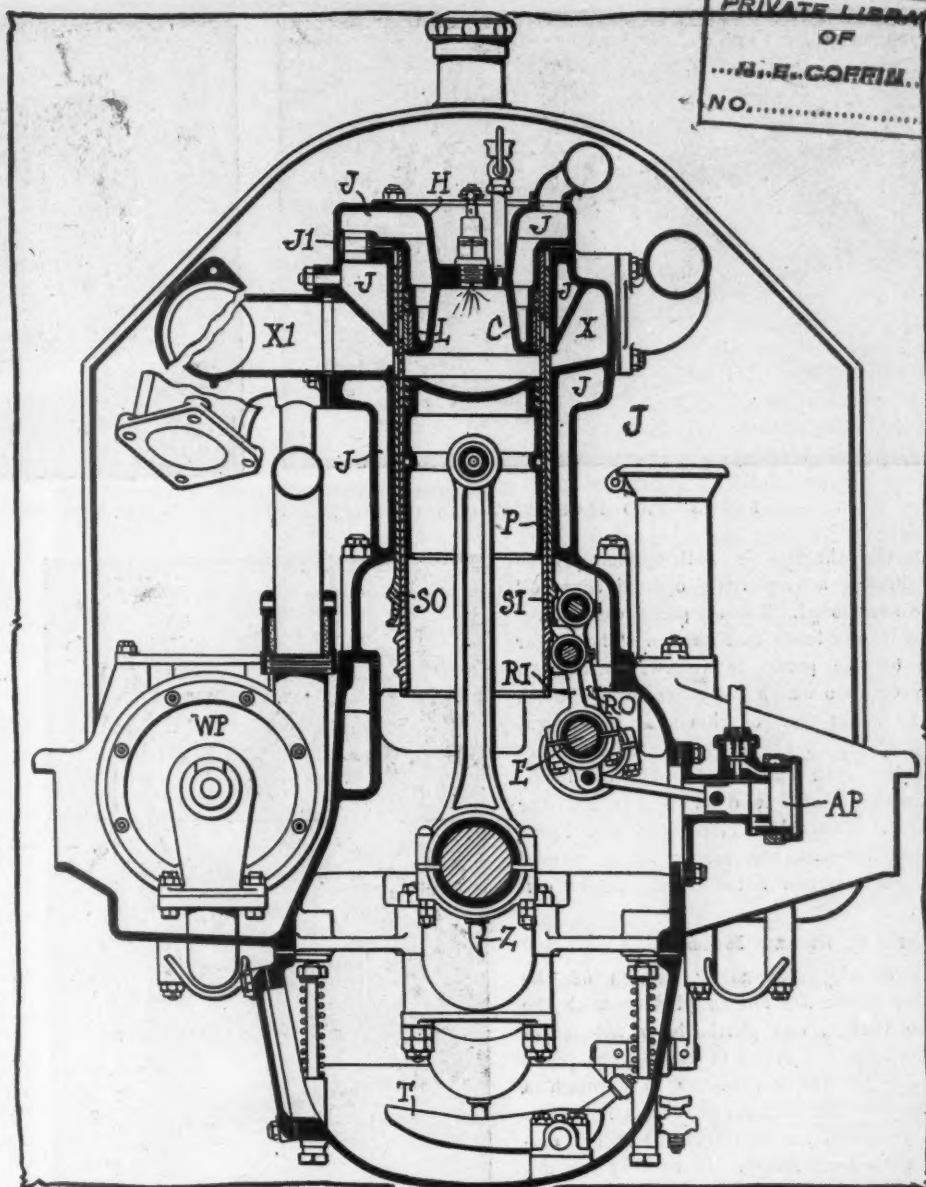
END SECTION STEARNS-KNIGHT MOTOR
